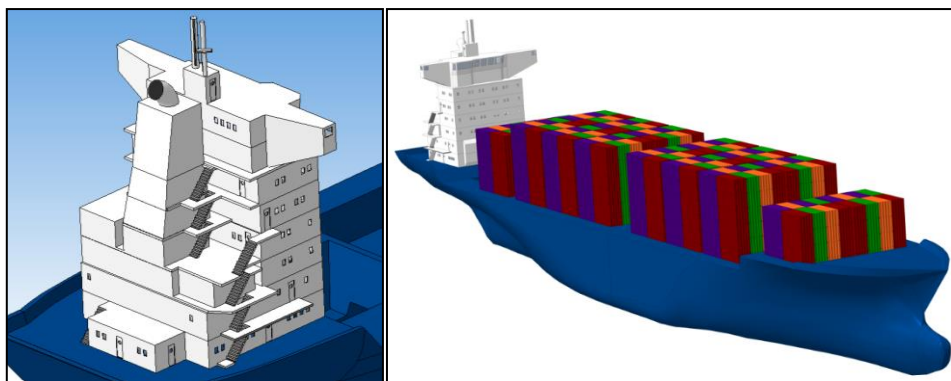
Creating a 3D assembly model of the MSC Panaya Drawings
